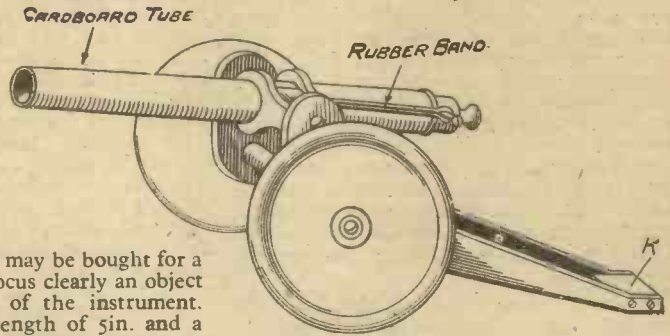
The finished model gun, made chiefly from a cardboard postal tube and cotton reels.
